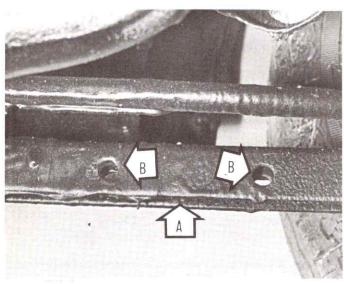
Rear suspension lower link and stabiliser bar attachment point (Sec 9)
